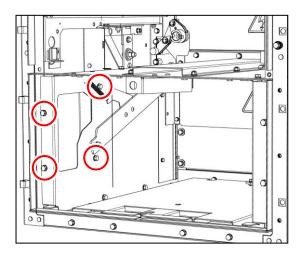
4 bolted joints on metal cover in voltage transformer compartment
